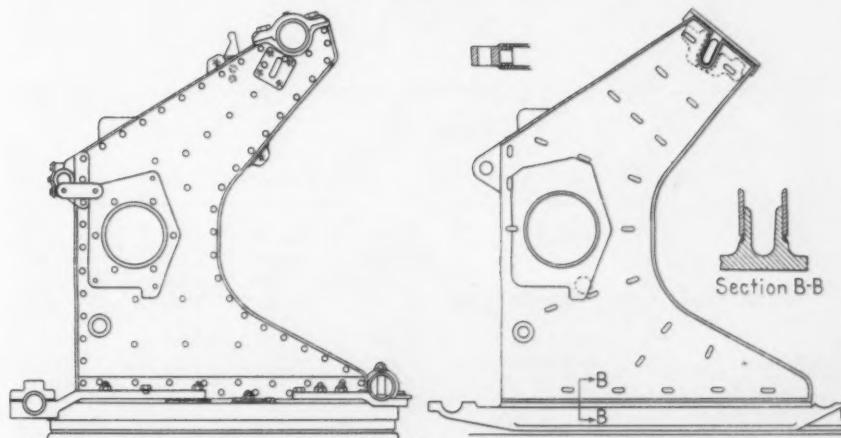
General features of construction of the riveted top carriage and the welded top carriage, showing the use of slot welds for holding internal braces.
